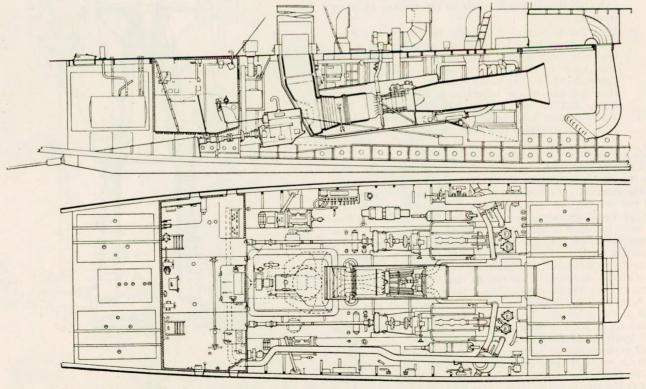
Elevation and plan showing details of Gatric installation in M.G.B.2009
